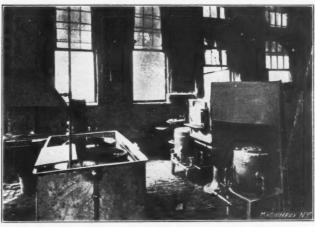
Barium-chloride Hardening Furnaces and Cooling Tanks
